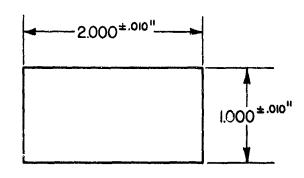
THERMAL-EXPANSION SPECIMEN
